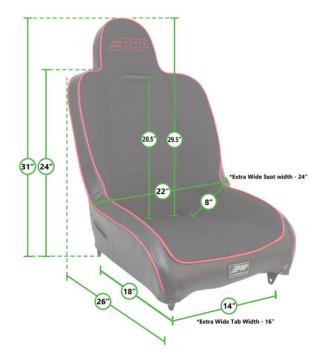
Image of the Suspension Seat to be Used that Outlines its Dimensions.
